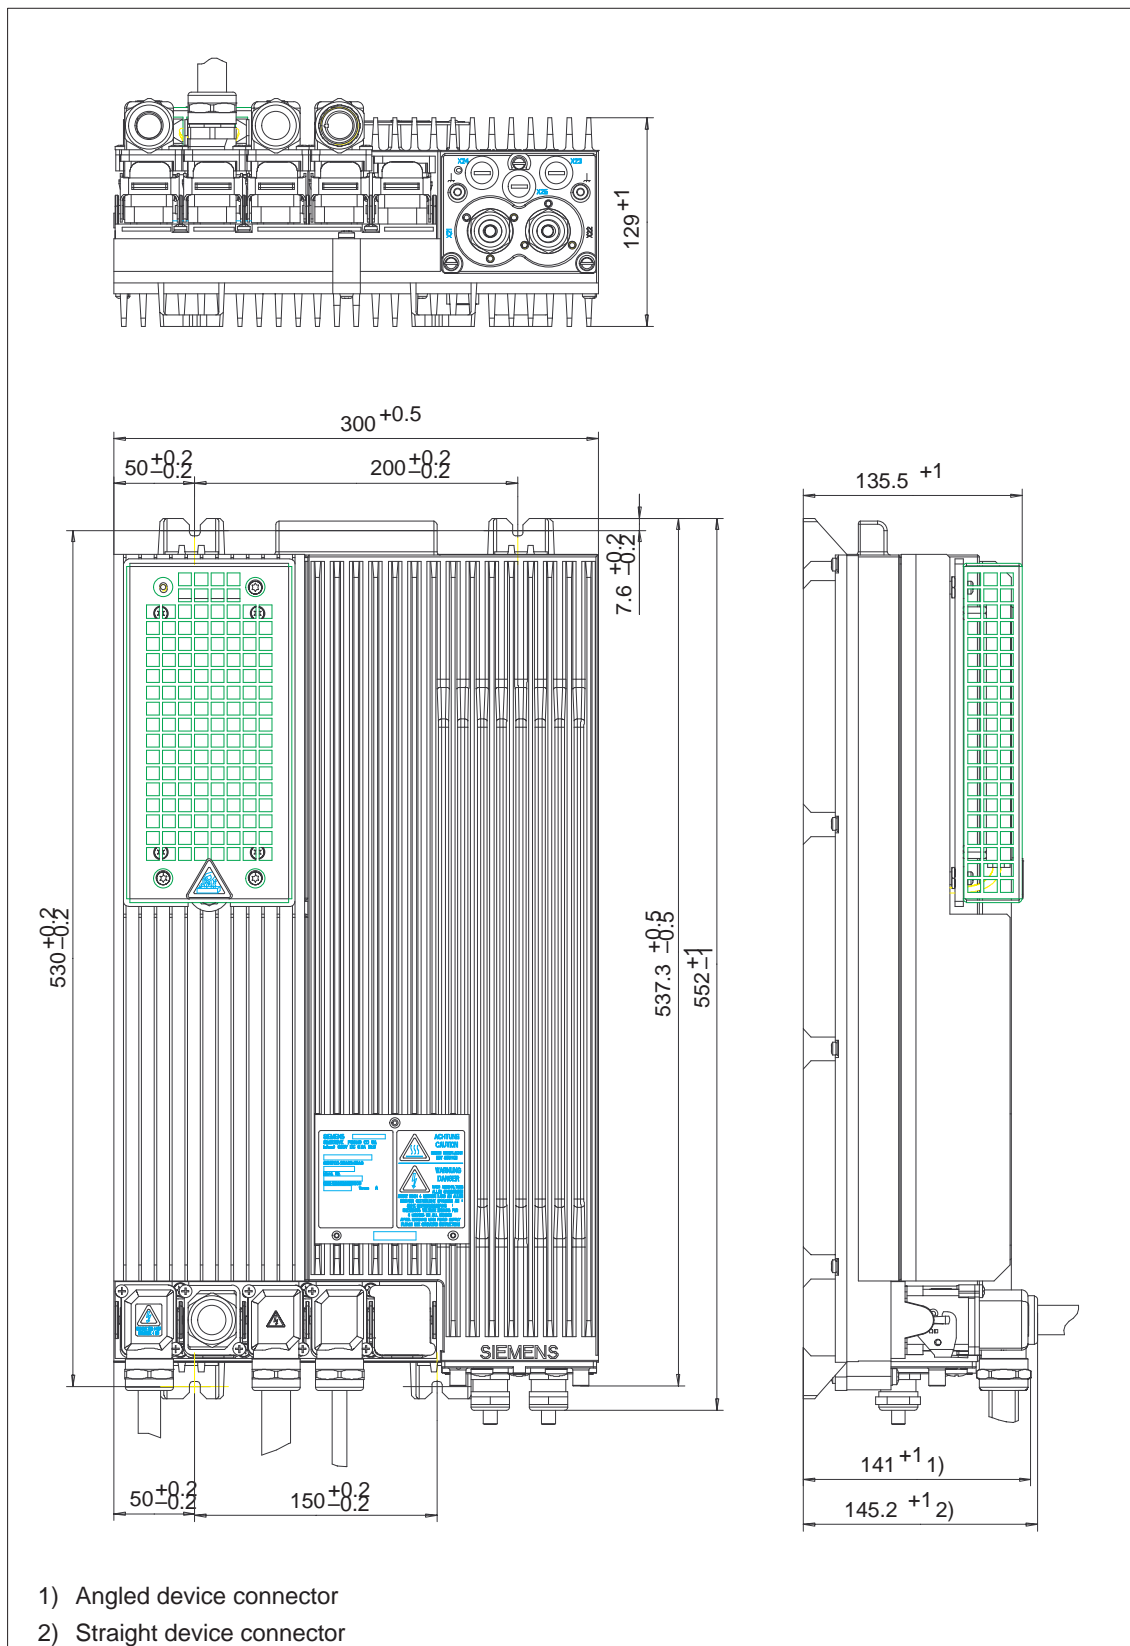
Dimension drawing POSMO CA 9 A, 6SN2 703-3AA1□-0BA1
